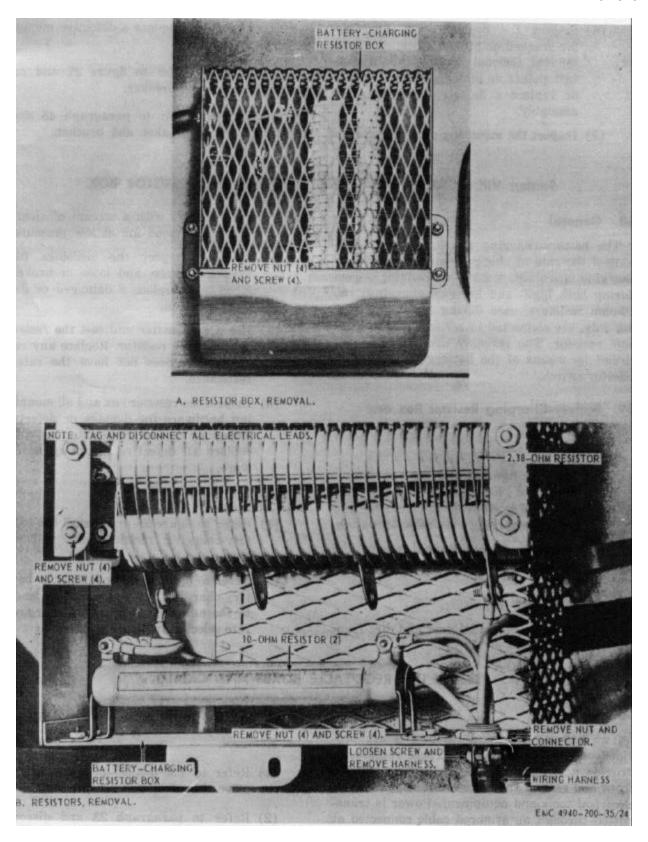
Battery-charging resistor box and resistors, removal and installation.
